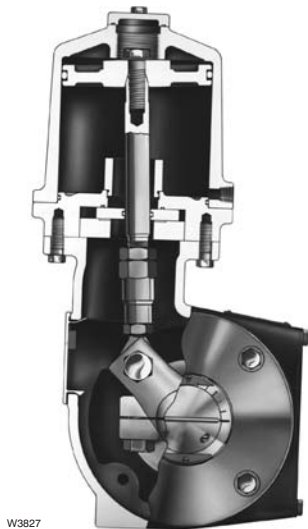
This Type 1061 actuator is a double-acting rotary piston actuator for throttling service.
